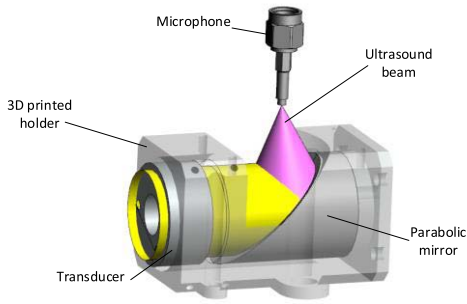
Parabolic off-axis mirror focusing holder 3-D drawing.
